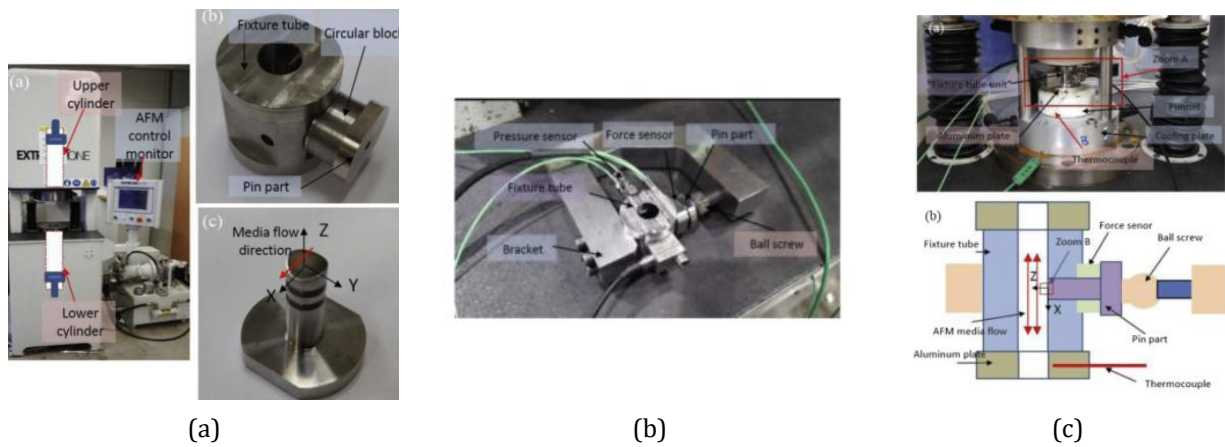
(a) AFM and 15-5P11 Stainless steel, (b) Fixture and Sensor, (c) Adapter [55].
